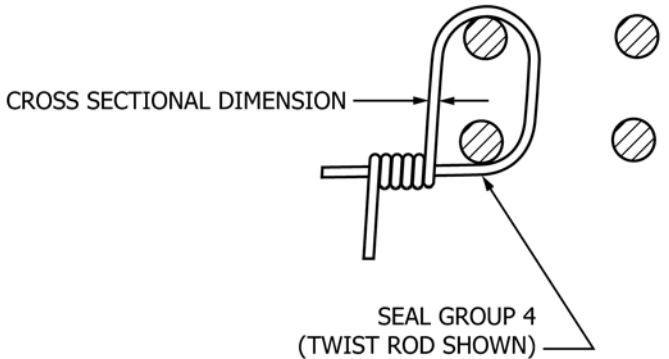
Schematic Drawings of Pull (Tensile) Test Fixture Requirements for Group 4
